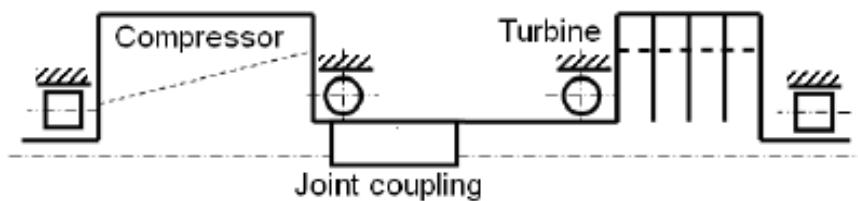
Four-support rotor with two radial-thrust bearings
